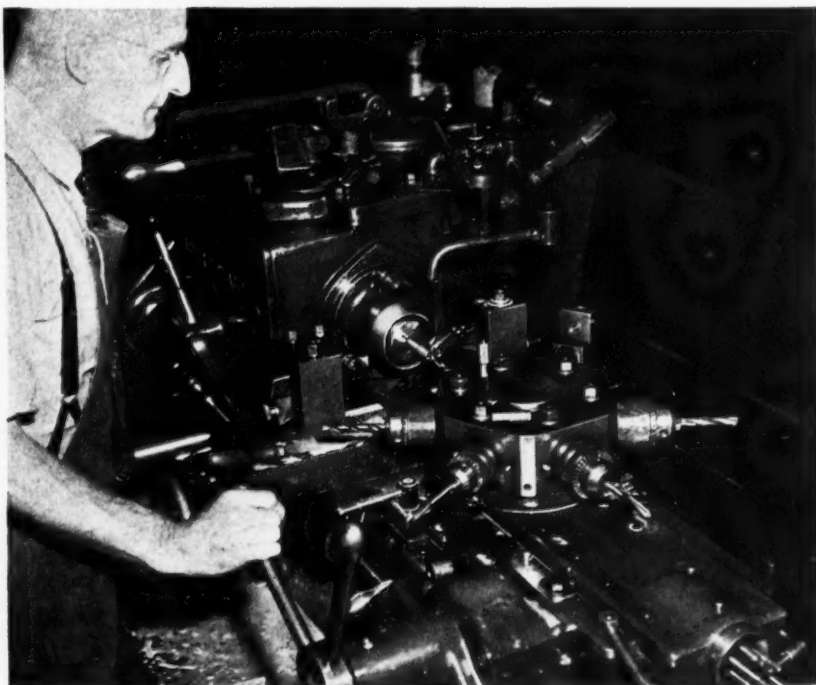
Turret Lathe Tooled up for the Production of Flap Control-rod Coupling Sleeves from Bar Stock
